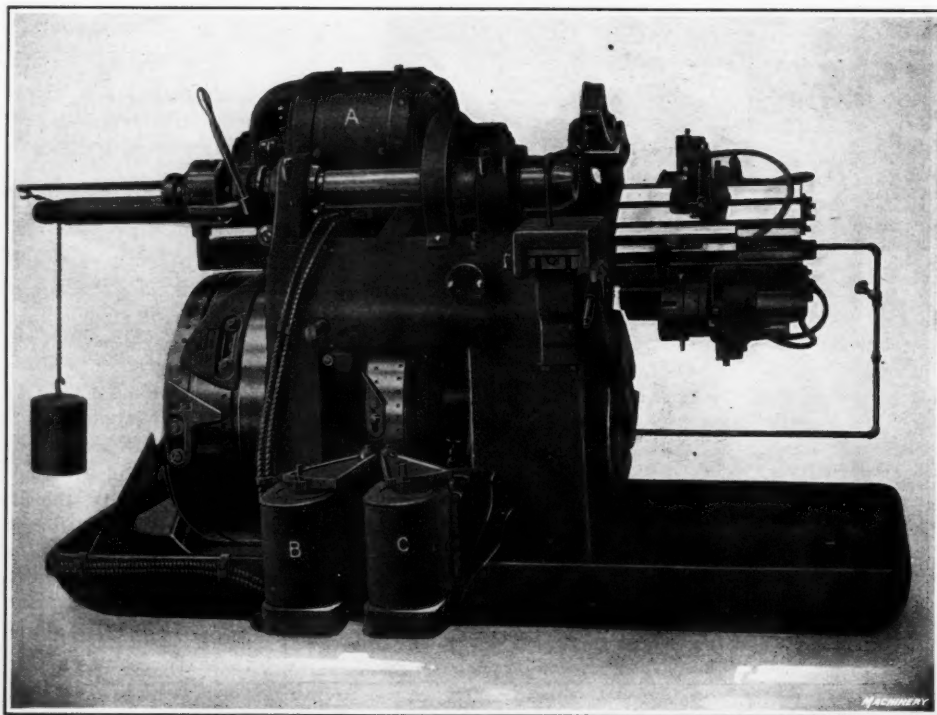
Gridley Single-spindle Automatic Turret Lathe equipped with Variable-speed Motor Drive
